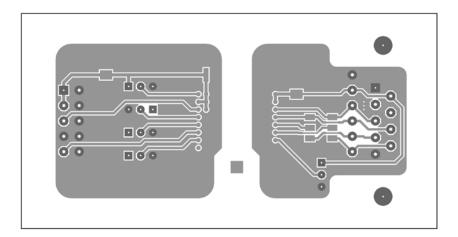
Low EMI Demo Board Layout (DC1746A), Top Layer
